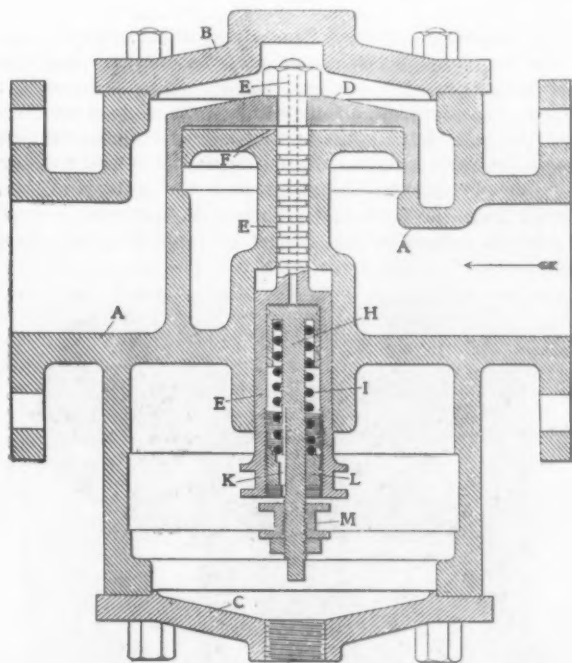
Longitudinal Section of the Sargent Steam Meter.
